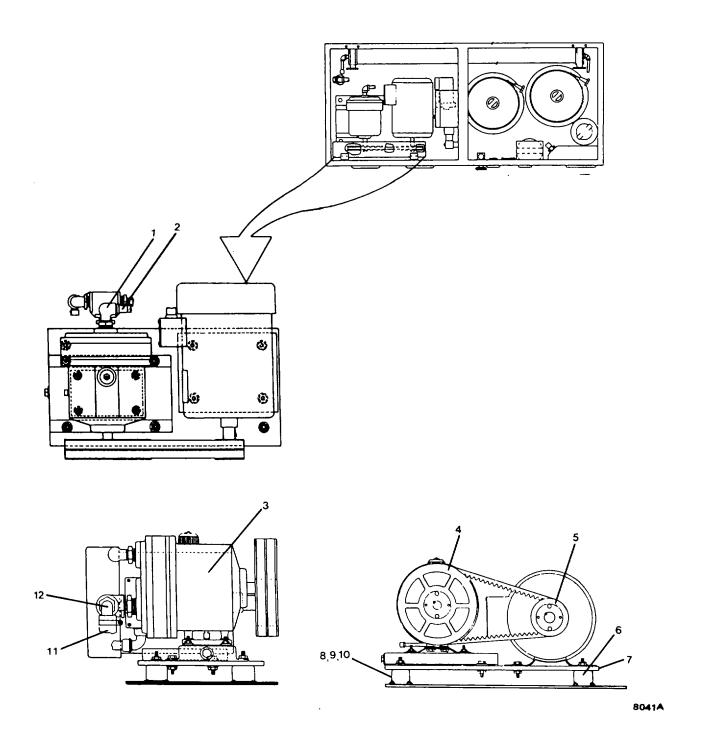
High Pressure Motor and Pump Assembly.
